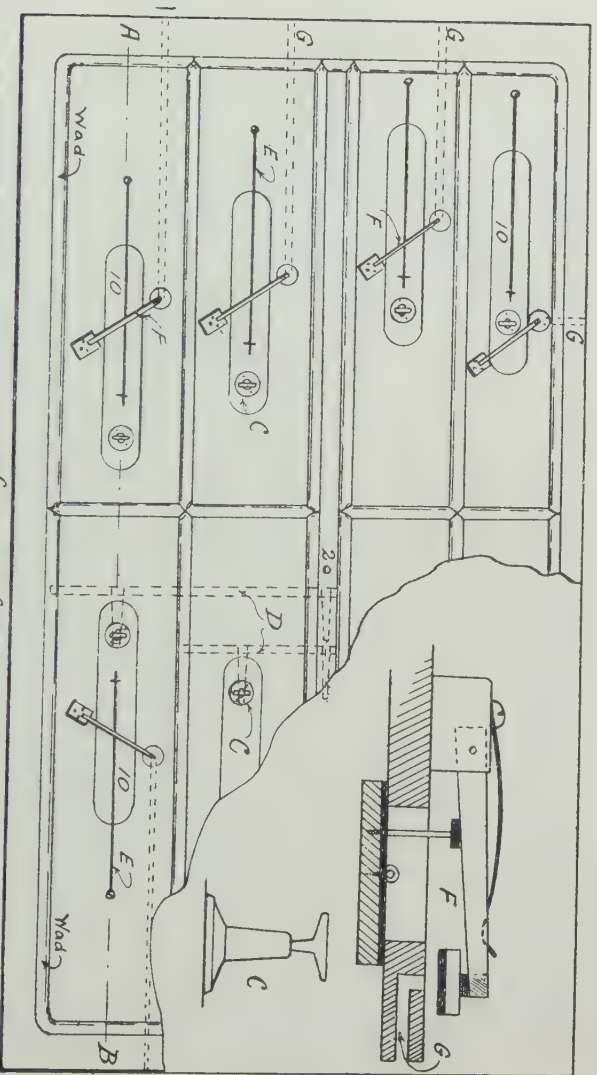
PLAN OF BELLOWS BOARD WITH SECTION, A B, &c.
